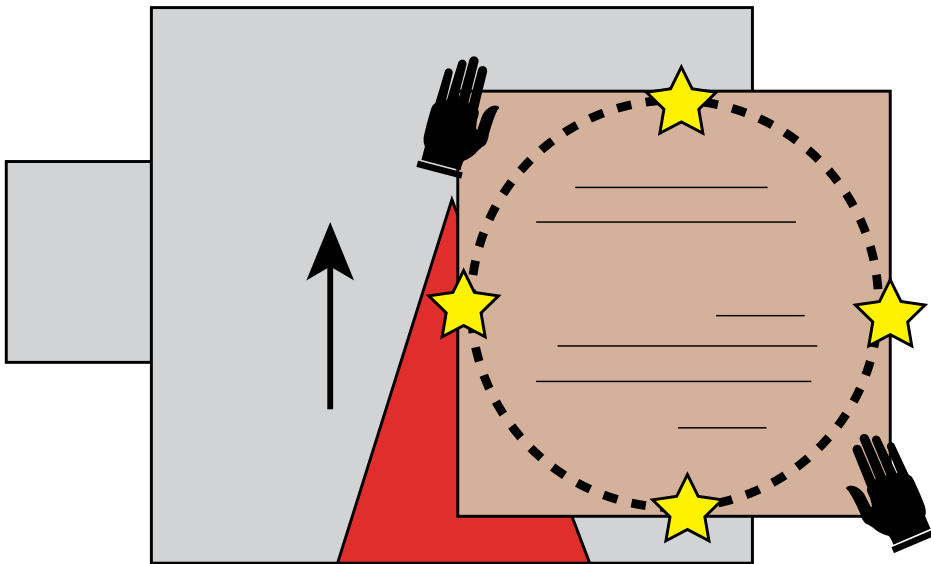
Position your left hand behind the sawblade and your right hand outside the danger zone as you cut a bowl blank. The stars represent the four places where the blade will exit the wood, potentially making the bowl blank jump forward.
